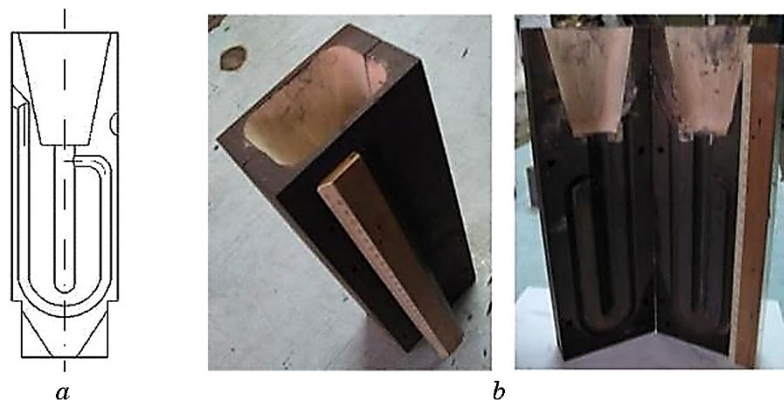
Scheme of the U-shaped fluidity test sample (a) and the casting chill mould (b) for its production.
